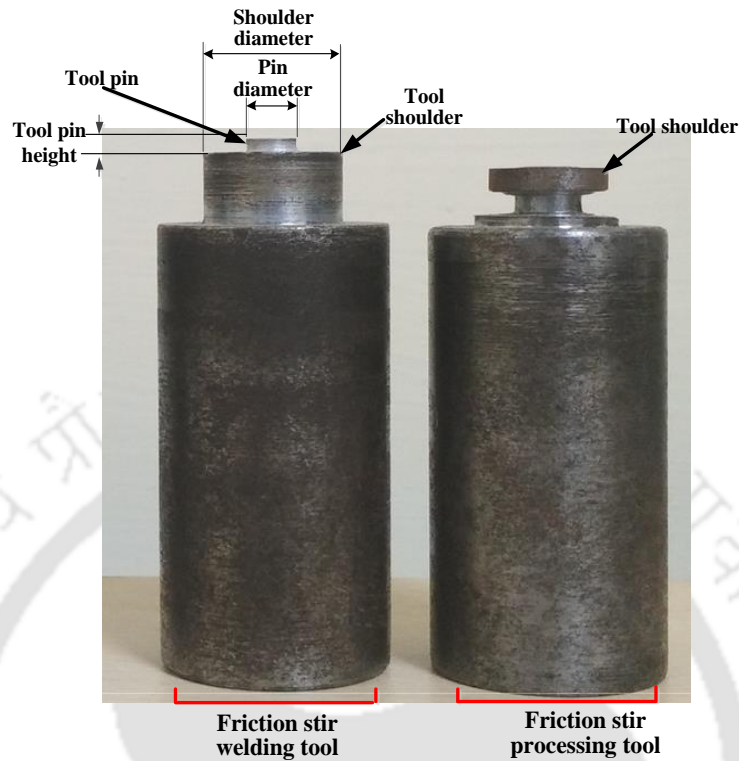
Friction stir welding and friction stir processing tools
